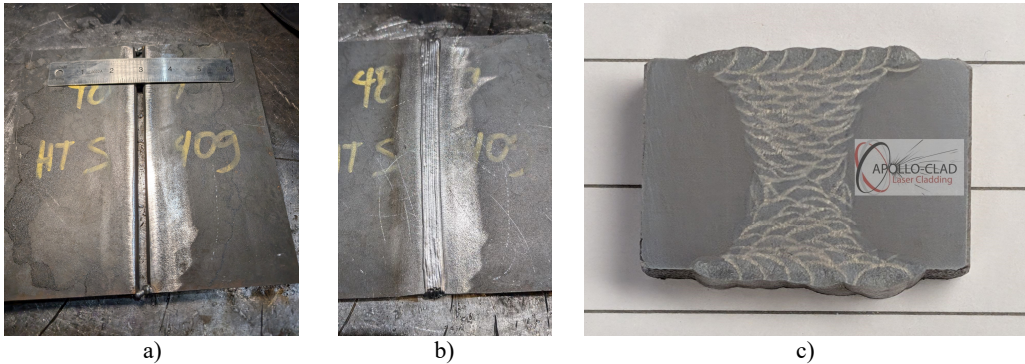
Open root HLBW: a) prior to welding, b) after welding c) etched cross section of weld shown in b [courtesy of Apollo Machine, Canada]
